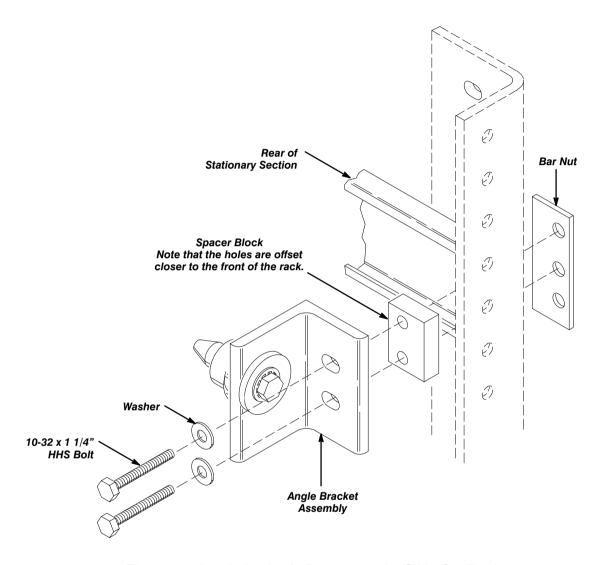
Attach the Angle Brackets to the Slide-Out Tracks
